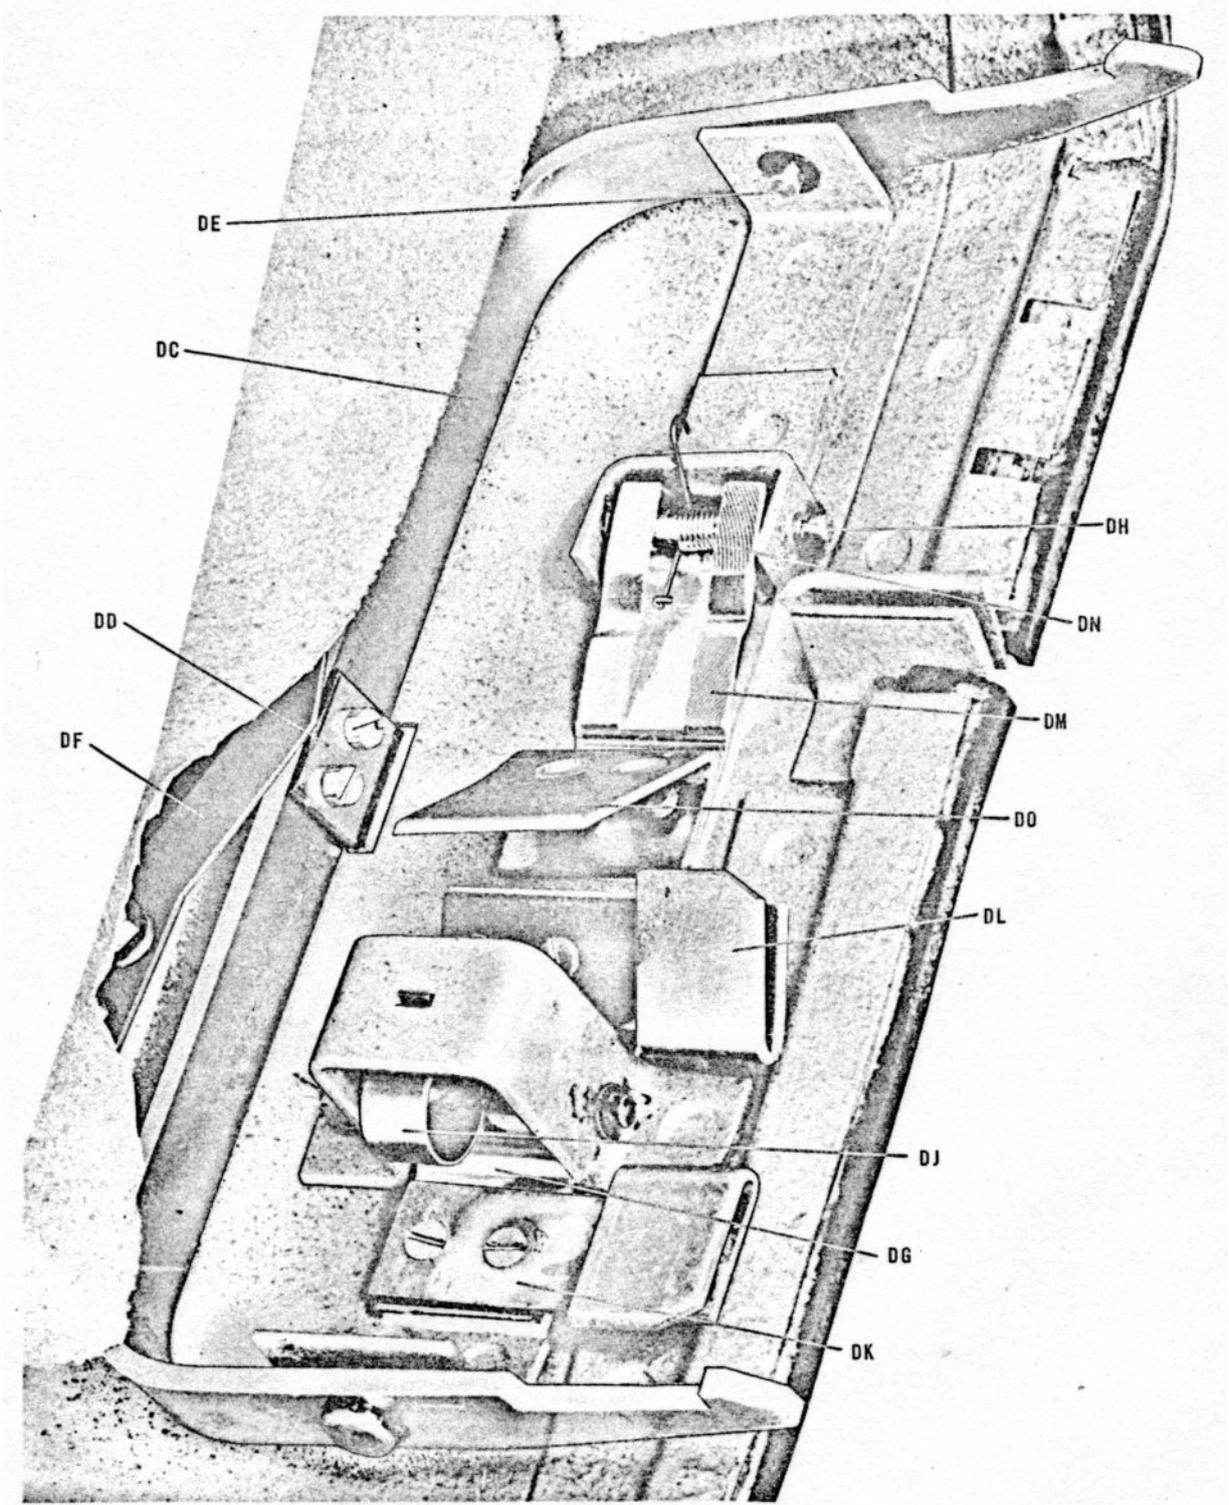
REPERFORATING AND TAPE READER ATTACHMENT COVER
